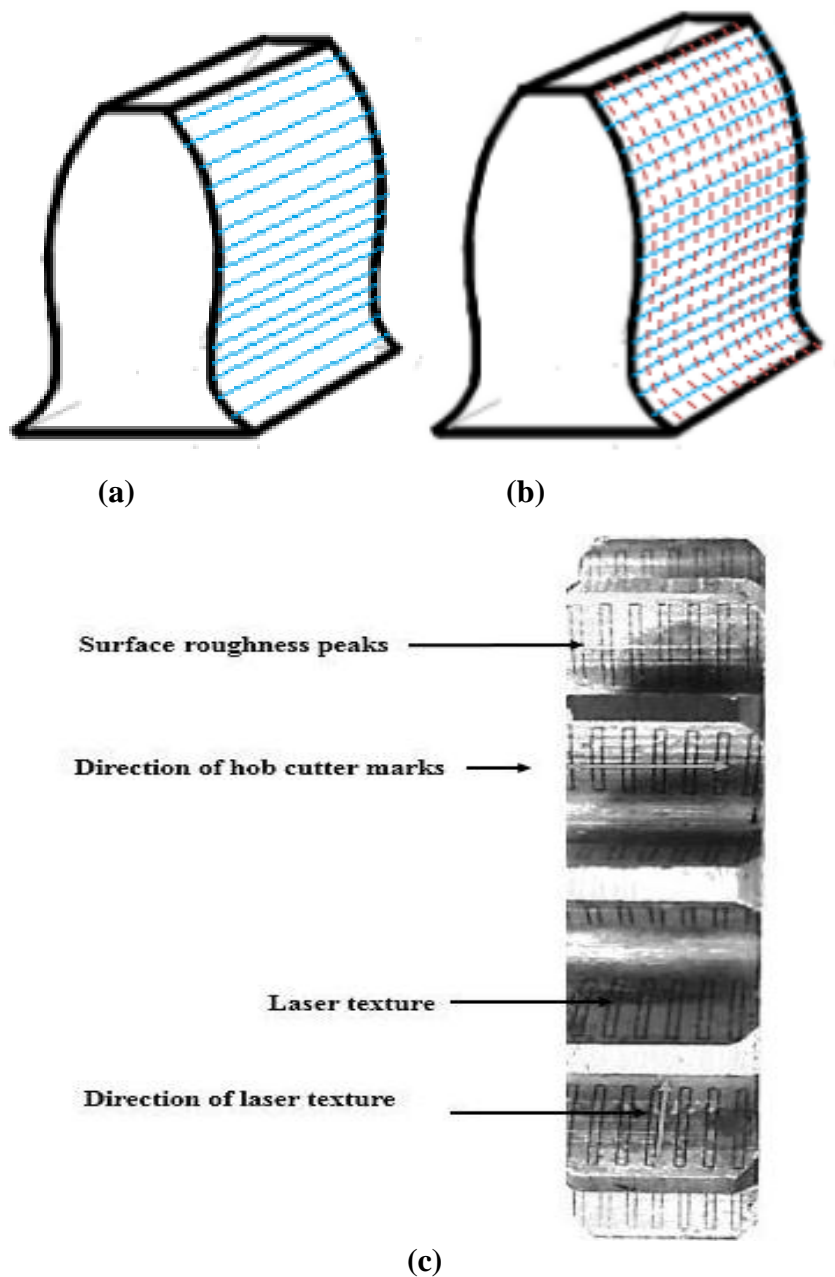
Schematic of lay profile of a (a) hobbed spur gear; (b) laser lay profiled hobbed spur gear; and (c) photograph of the laser lay profiled hobbed spur gear.
